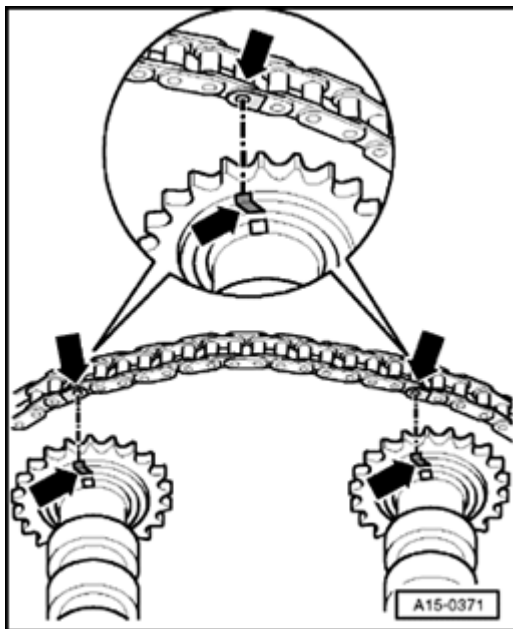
Moving Color Markings to Aligned Position (Using Old Drive Chain)
